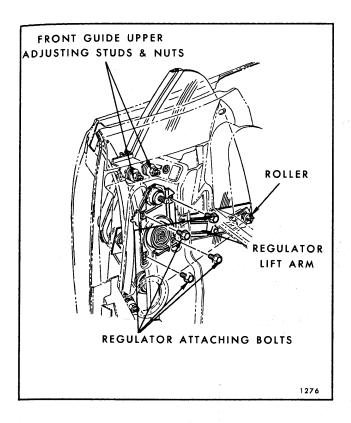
Rear Quarter Window Regulator Attachment –
